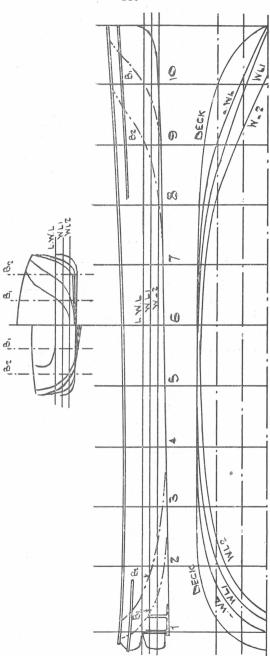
Sheer Draught Dutch Passenger Vessel.
